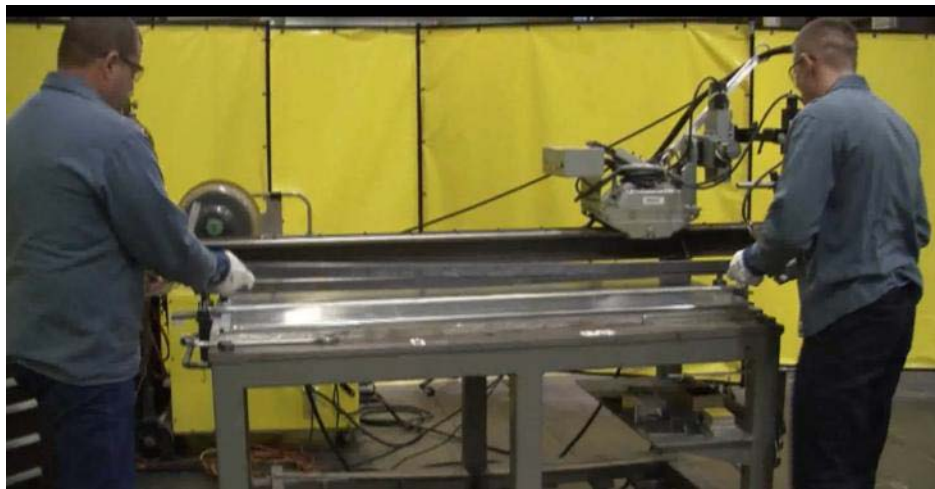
B – Placement of the Cambered (Curved) Steel bar over the top of one of the two plates to be welded.
